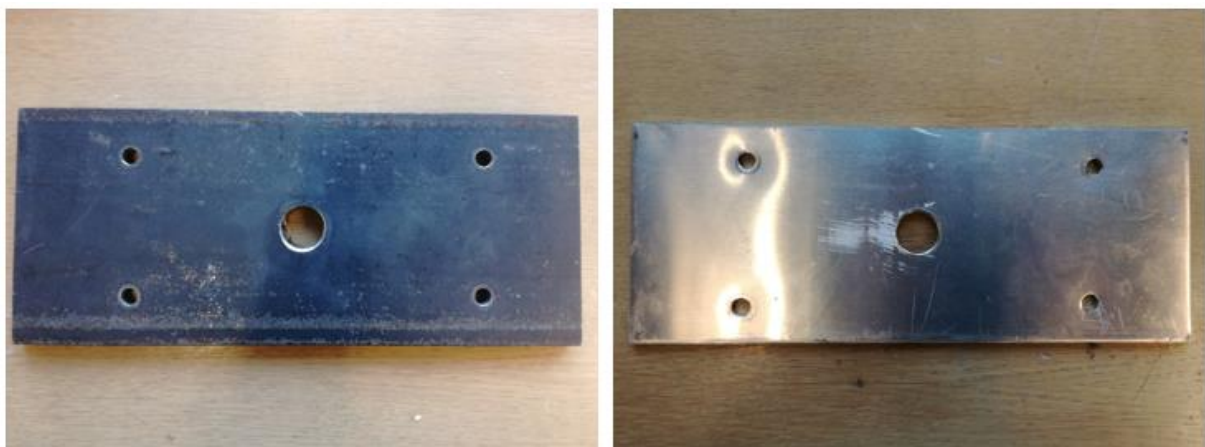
1 centimeter thick steel end plate (right) and 3 millimeter thin aluminum end plate (left).
